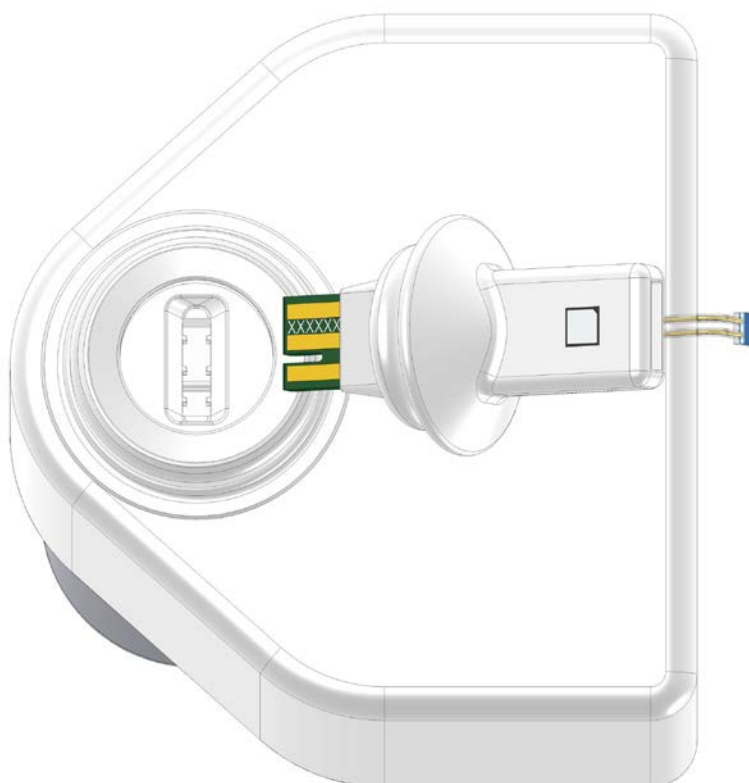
Orientation of the hygro-thermo module during re-assembly.
